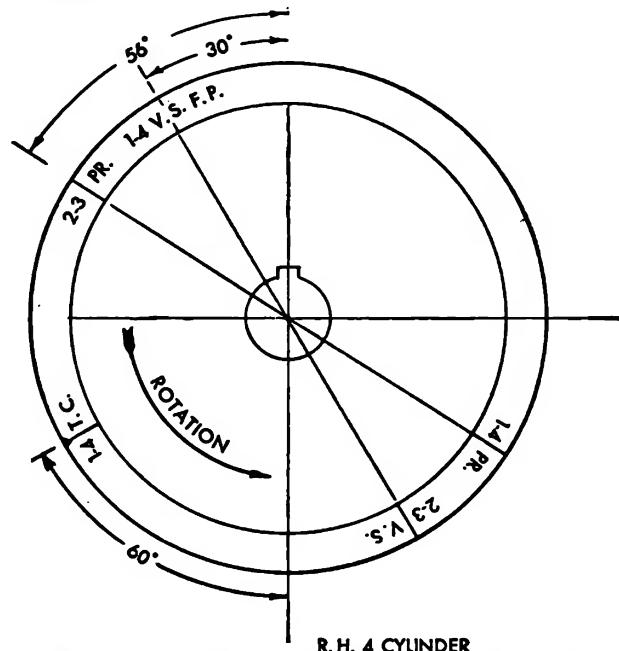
Timing marks on 4 cylinder right hand engine fan drive pulley
